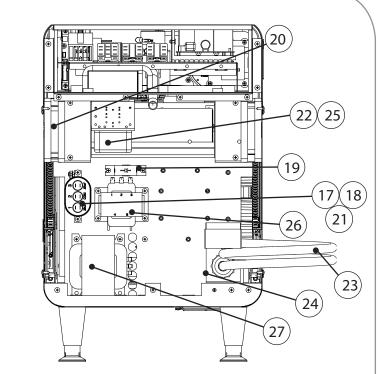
Outer Shell and Back Cover Removed Single Magnetron Sota
